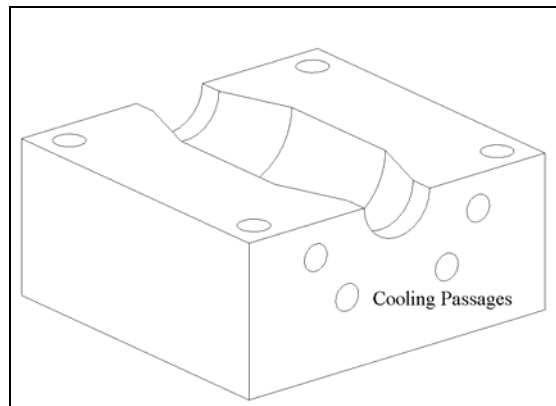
3-D Wire-Frames Drawing of Combustion Chamber
